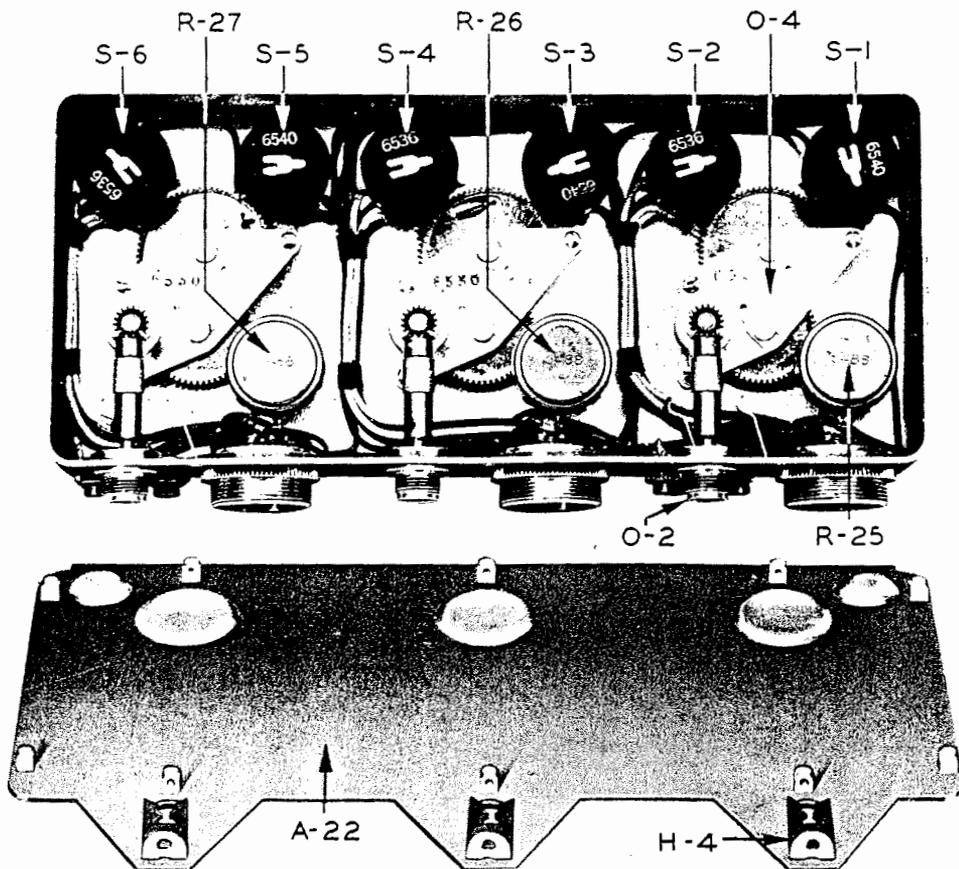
B—RADIO CONTROL BOX BC-450-A, REAR VIEW WITH COVER REMOVED
